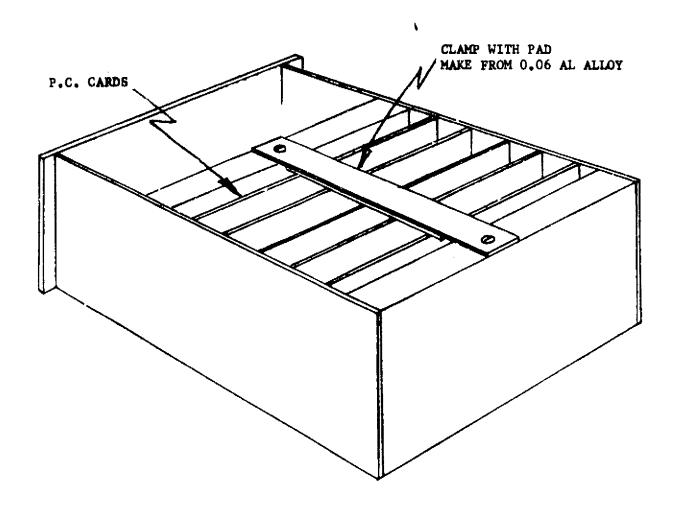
Printed Circuit Board Securing - IF Section
